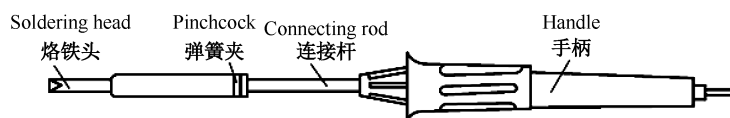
Structure of Internal Heating Electric Soldering Iron 内热式电烙铁结构
